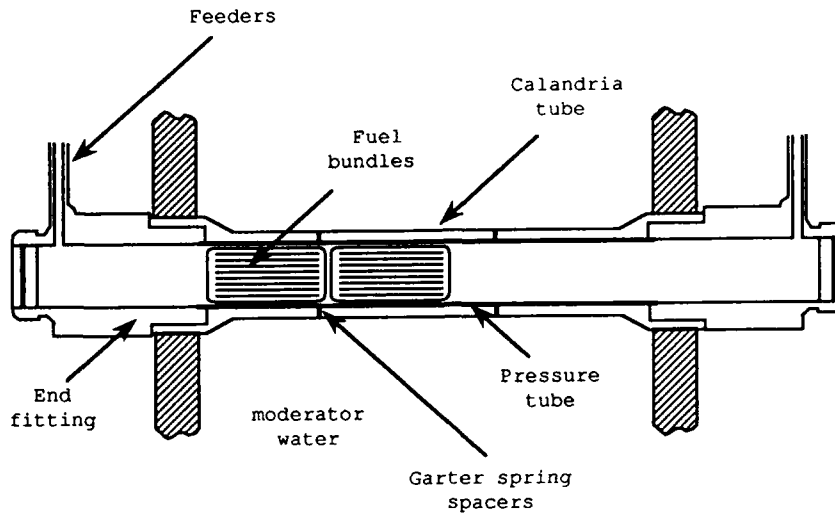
Fuel channel consisting of a Zr-Nb pressure tube.
